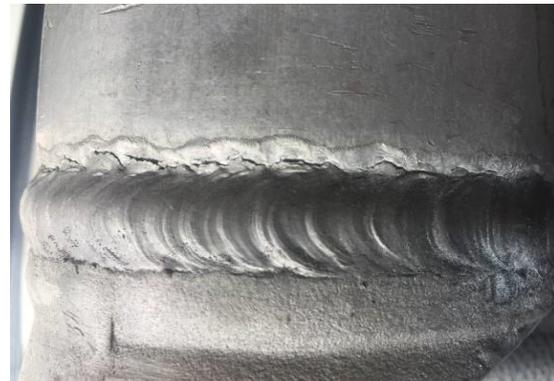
The clamp weld undercut and crack on phase A of #2 transformer
